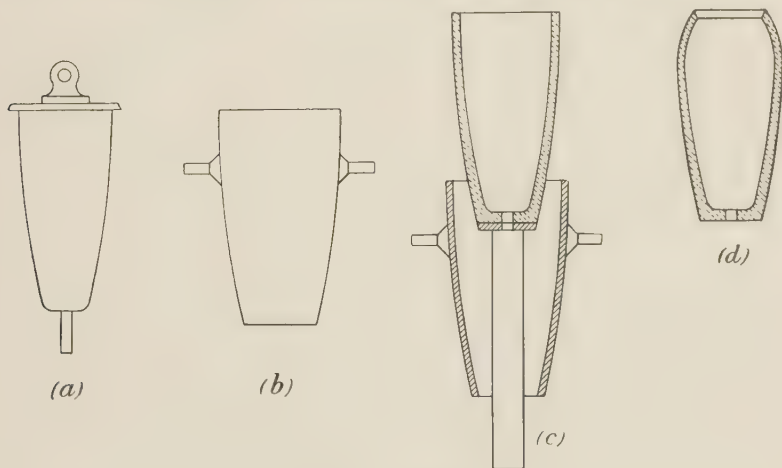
Plug and Flask for Moulding Crucibles by Hand.
